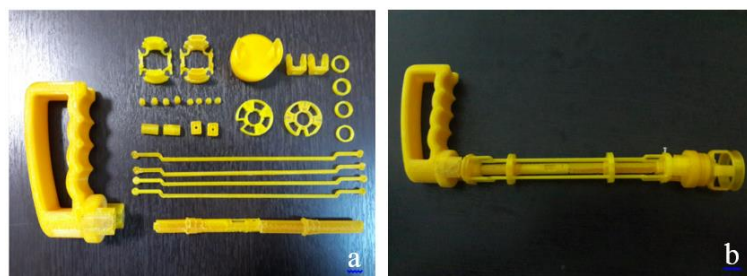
FDM manufactured parts by yellow filament PLA (a) and assembled mechanism (b).
